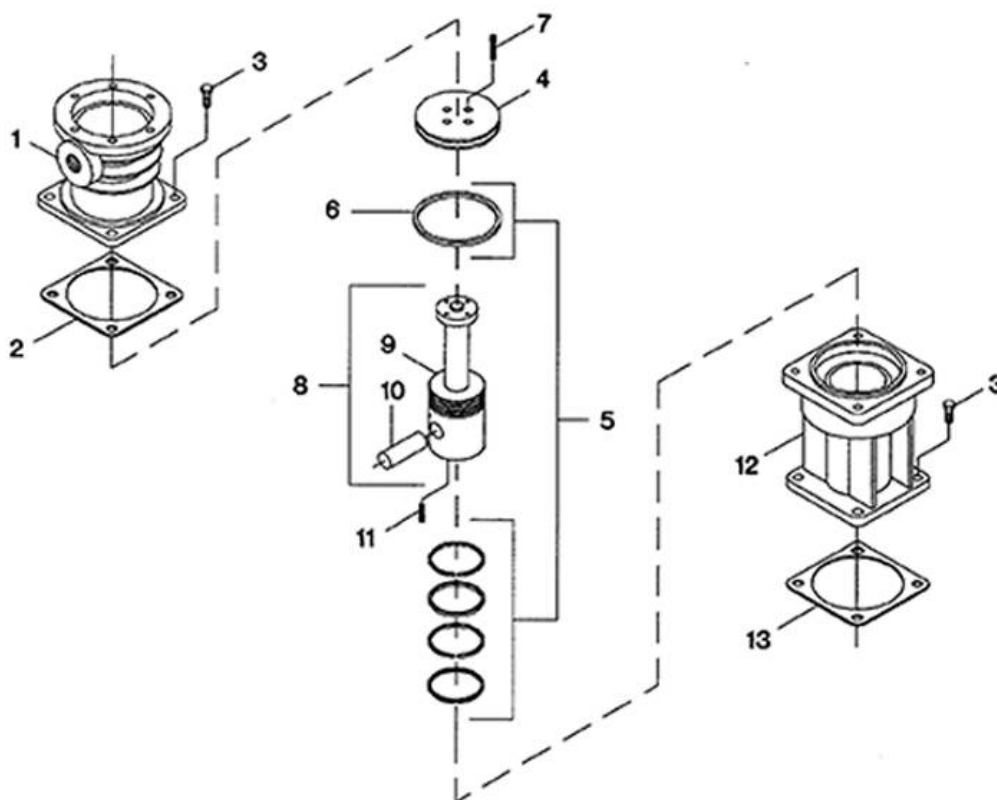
FIRST STAGE (5") PISTON, CYLINDER & CROSSHEAD.
